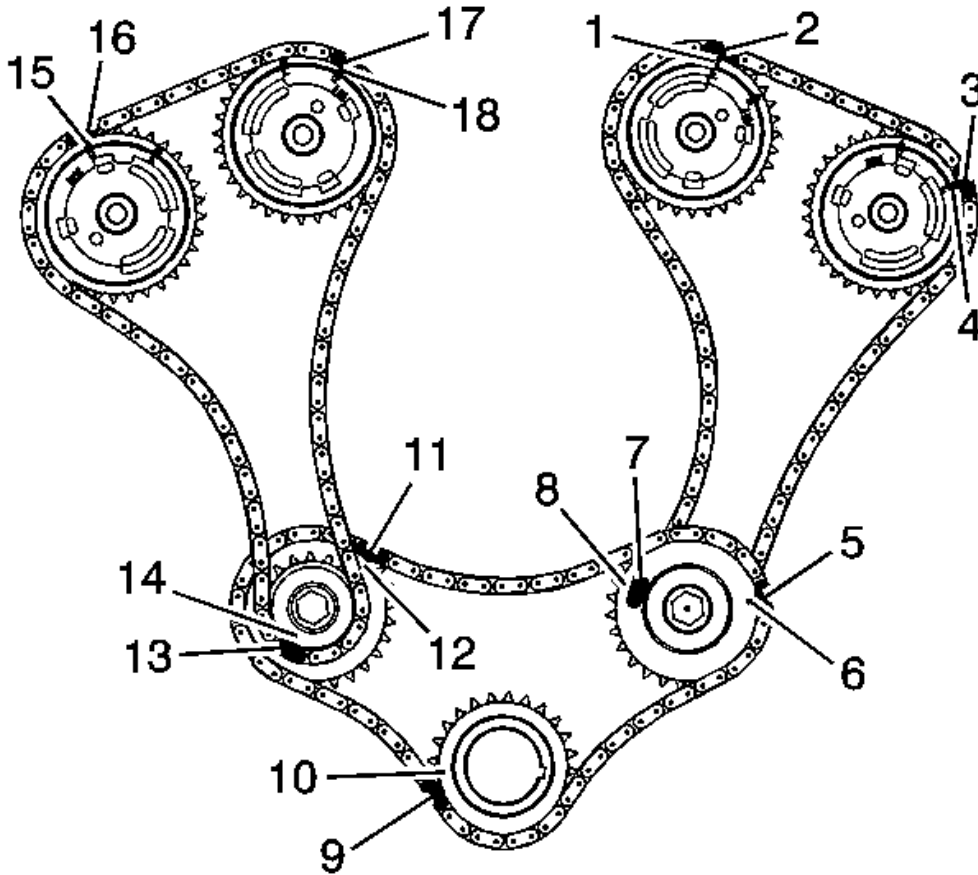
Identifying Timing Chain Marks & Locations On Gears, Sprockets & Actuators
